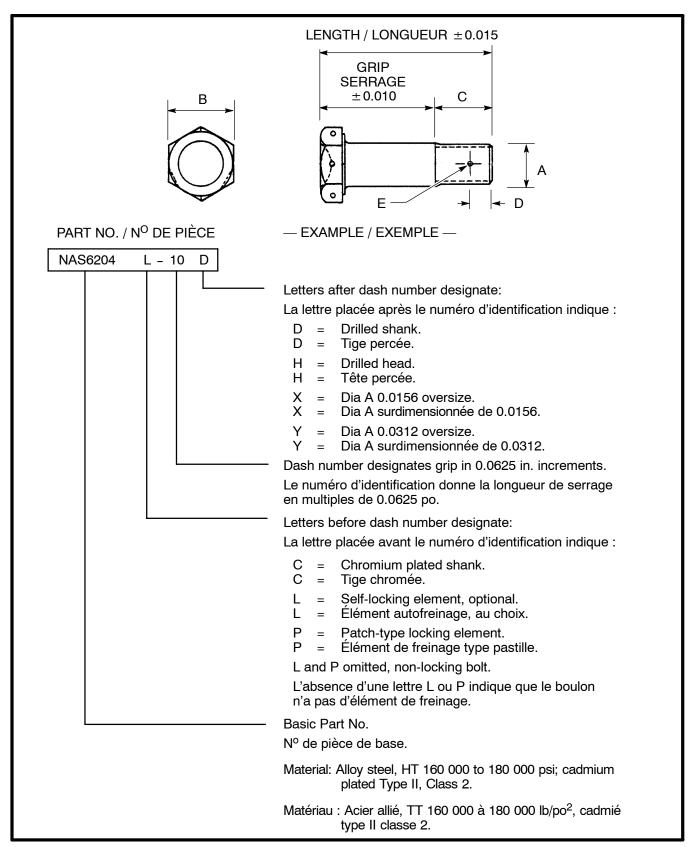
(Sheet 1 of 3) Bolt, Close Tolerance, Standard and Oversize, Self-Locking and Non-Locking, NAS6203 to NAS6220
